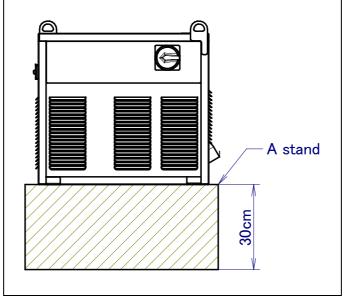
(e) Quantity advance of welding power supply.
